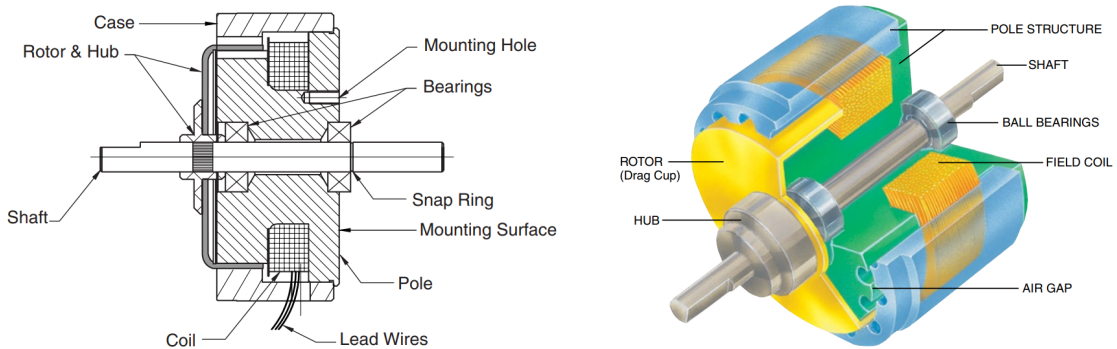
Exploded view of a magnetic hysteresis brake. Image on the left is from [24], image on the right is taken from [23].
